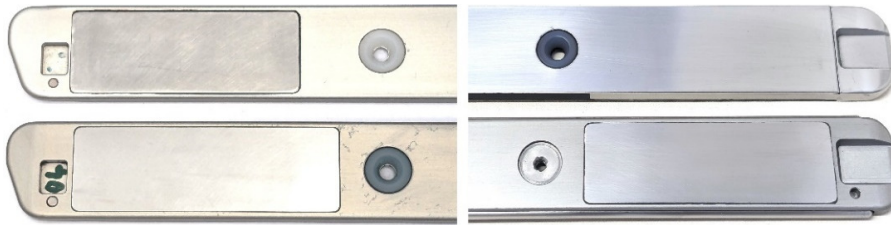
Take-up bar front endings (left upper type d, left lower type e) and rear endings (right upper type c, right lower type f)
